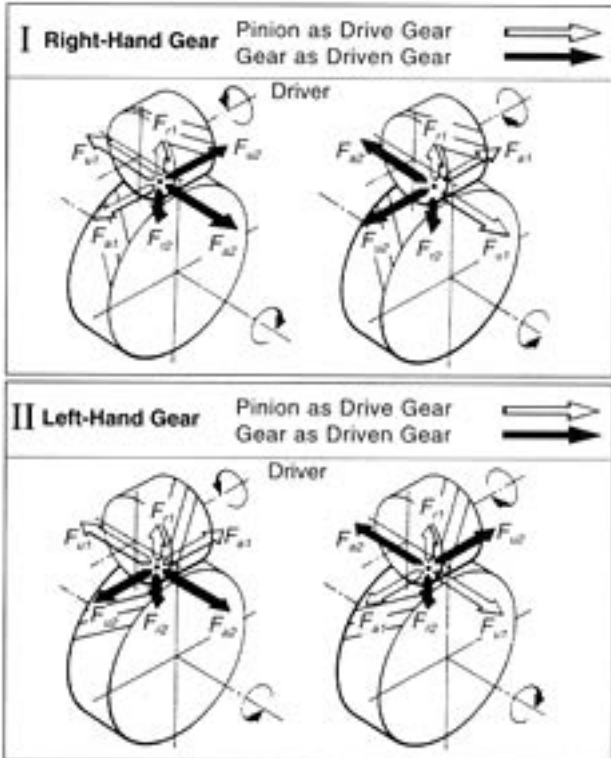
Directions of Forces in a Screw Gear Mesh
